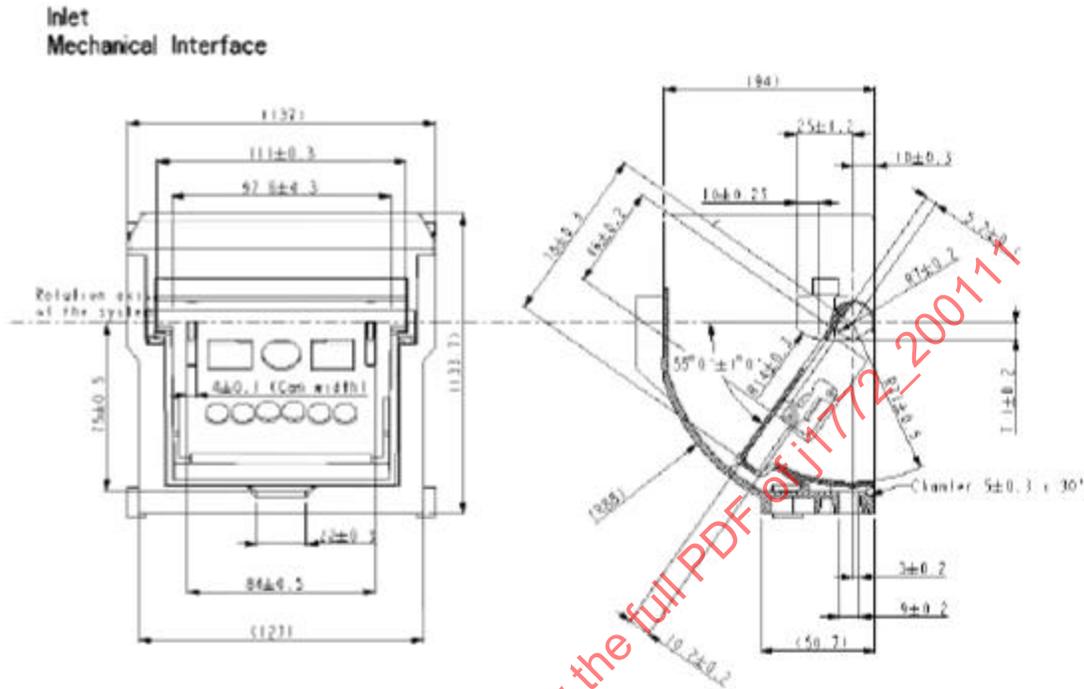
VEHICLE INLET PHYSICAL CONTROL DIMENSIONS
